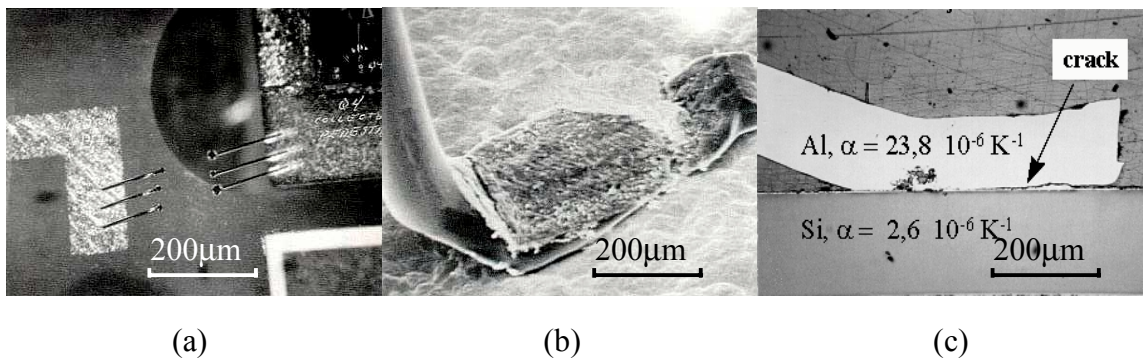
Wire bond failures: (a) photograph shows electrical overstress indicated by fusing of three parallel wirebonds of a power transistor (courtesy of Motorola); (b) wire bond heel crack, overbonded (courtesy of Motorola); and (c) wire bond fatigue crack (magnifications were estimated).
